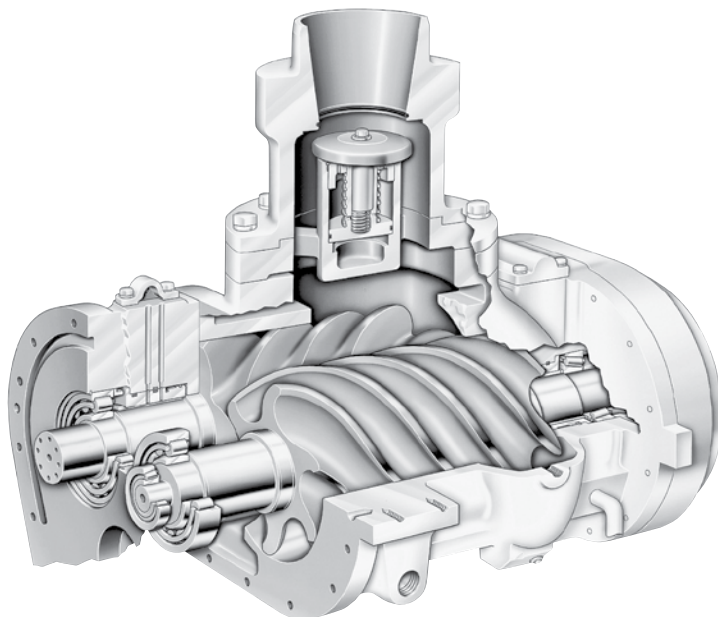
Oil Free, Water Injected Rotary Screw Compressor
